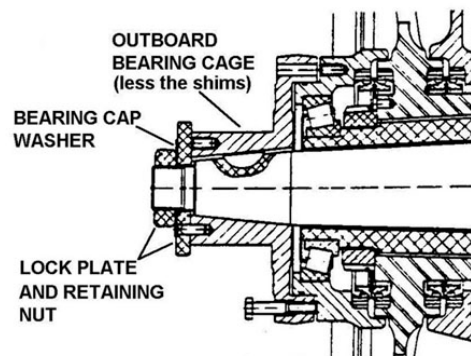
Installation of the outboard-bearing cage lock nut.
